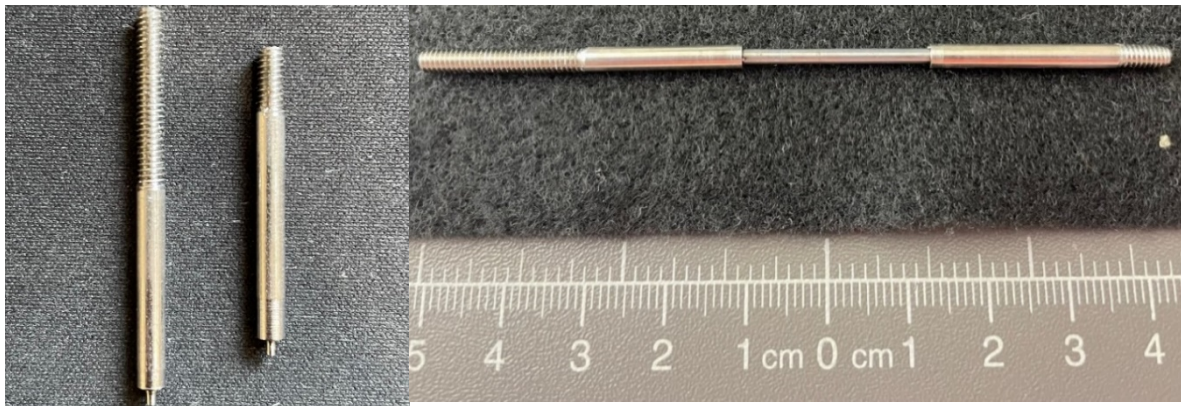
(Left) Machined reference materials and (right) the final assembly of reference material rods and the magnetic core.
